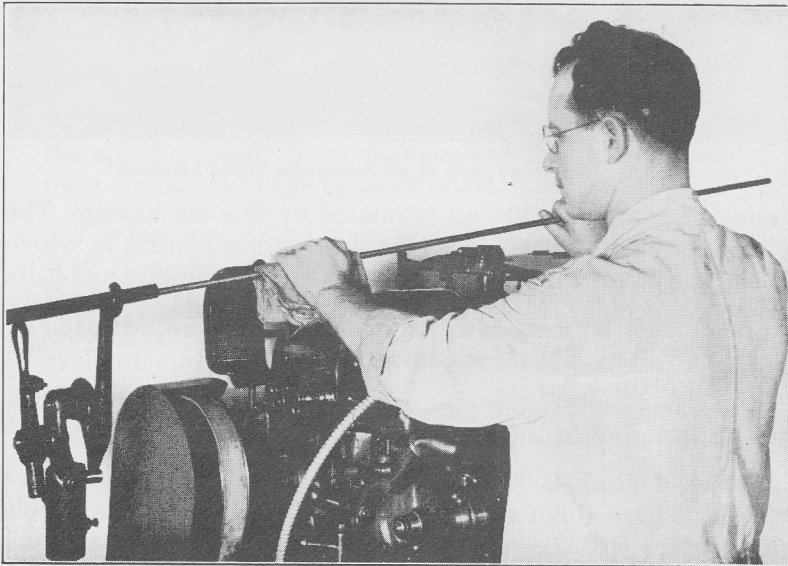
Inserting bar stock into stock tube of the Automatic Screw Machine
